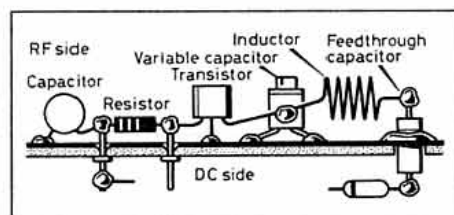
Pin-and-wire construction on single-sided board, copper side uppermost
